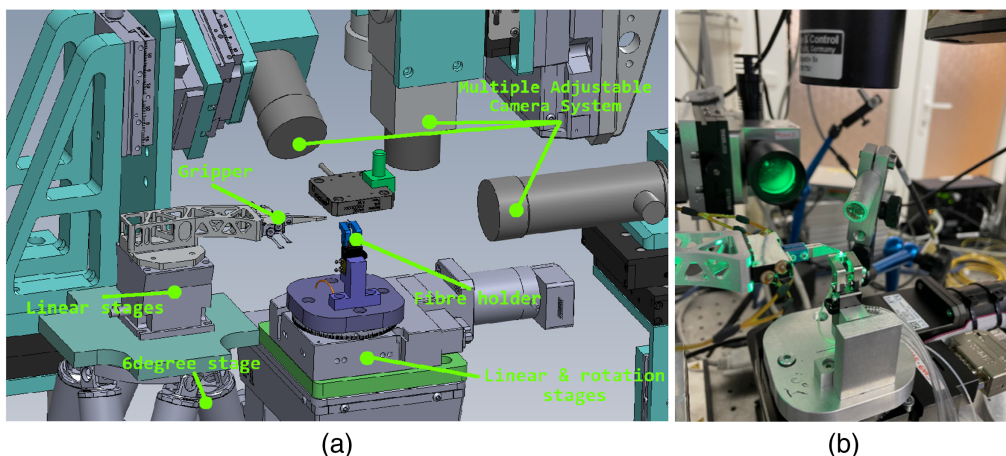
(a) Schematic view and (b) photo of the implemented assembly station.
